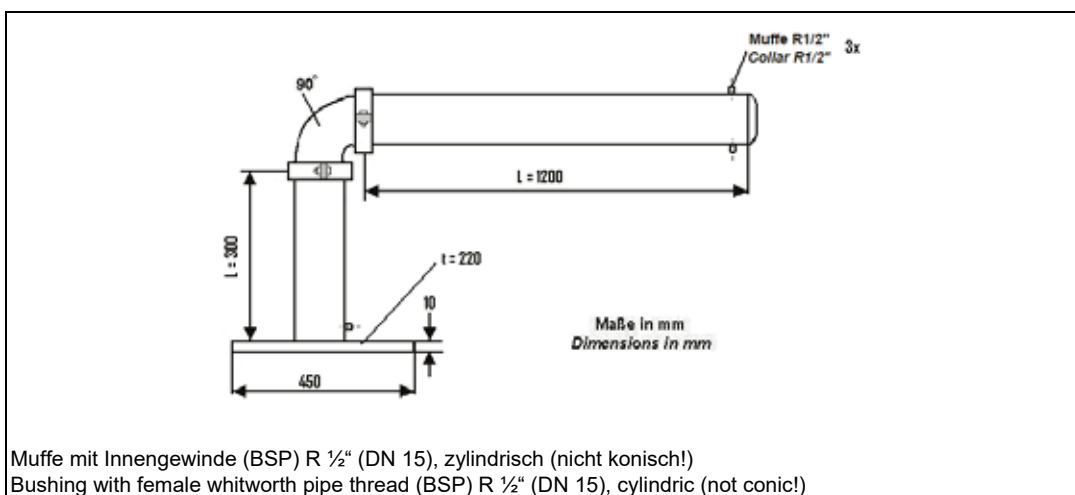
shows an example of a test equipment. Other types of test equipment can be used as far as the dimensions specified in Figure A.5 are observed.
